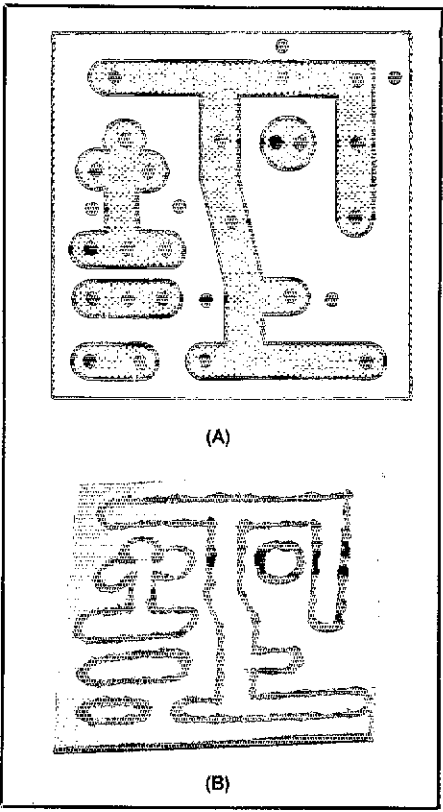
Drawing A represents a hand-drawn circuit-board pattern. The completed board is shown at B. The islands were cut from the copper with a hobby motor and small abrasive bit.
